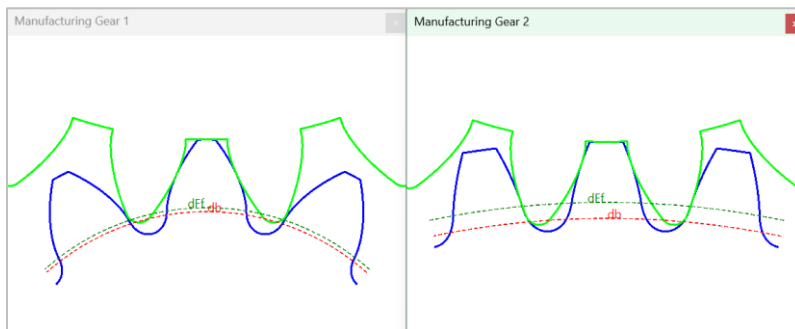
Manufacturing Gear 1 and Gear 2, each with a shaper cutter.
